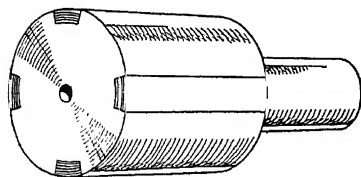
Reinforced plug gauge for hard-wearing surface.
